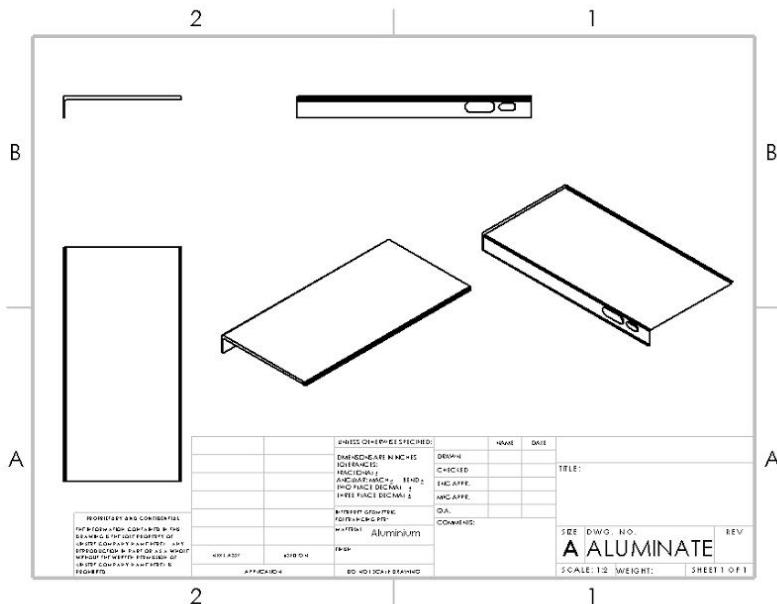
Solidworks drawing of the Faraday Case Prototype 3.0 - Upper part
